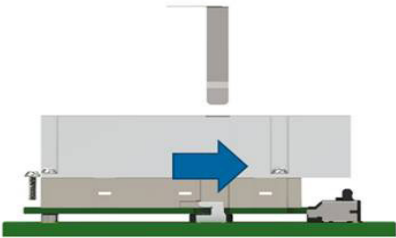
MODULE INSTALL AND LATCHING WITH HIGH SPEED CONNECTOR LATCH
